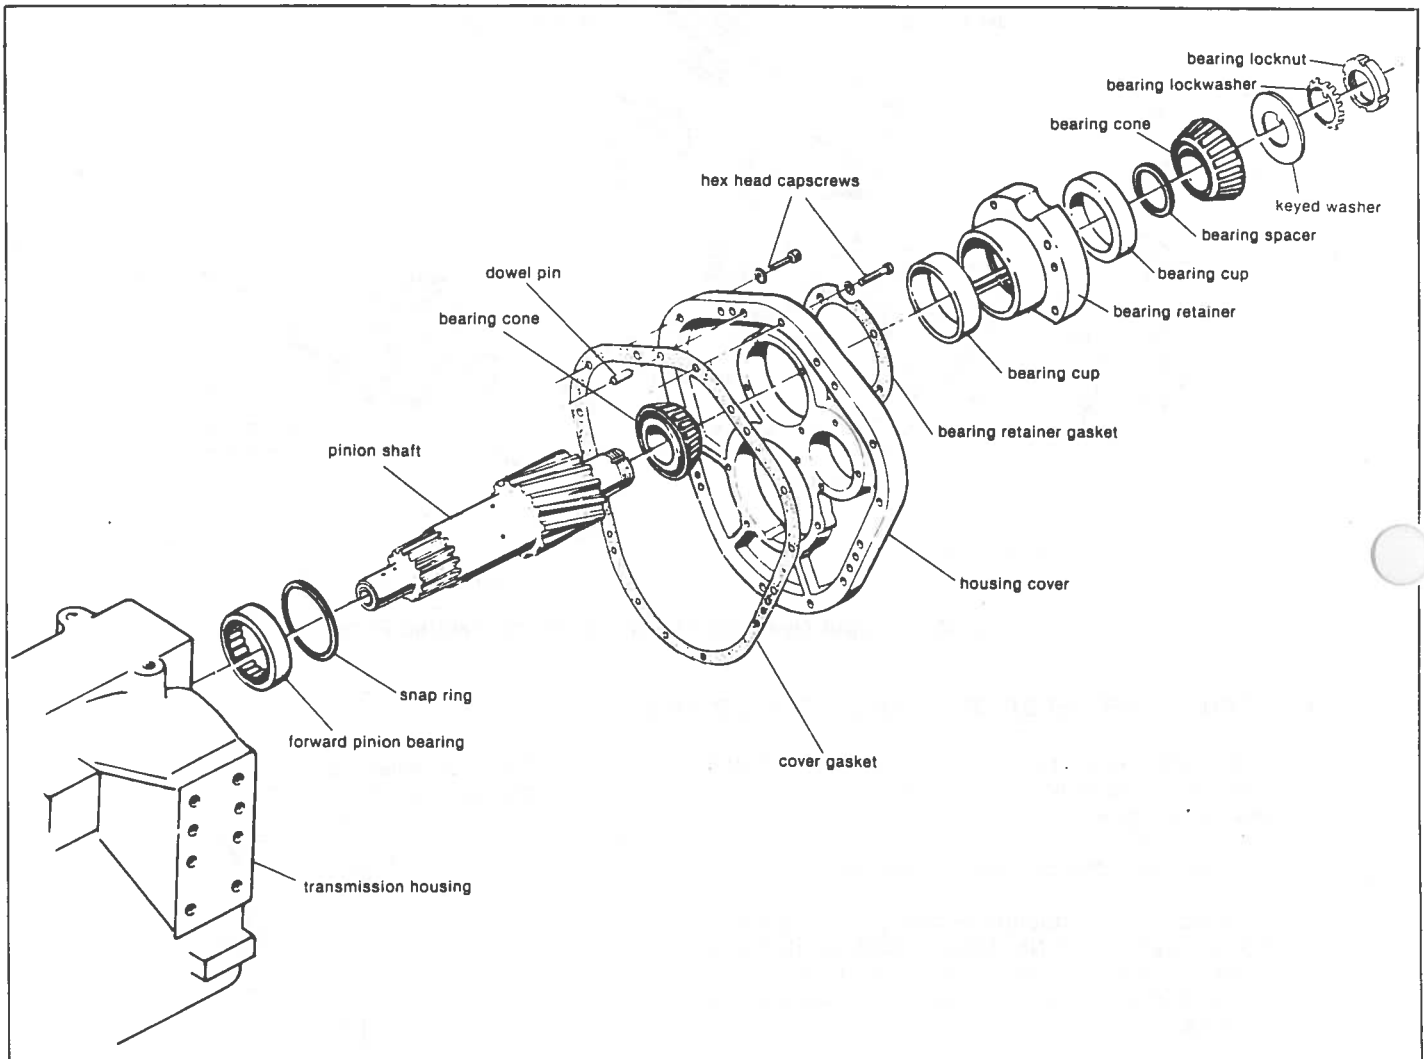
Pinion Shaft, Bearings, Bearing Retainer, Cover and Related Parts
